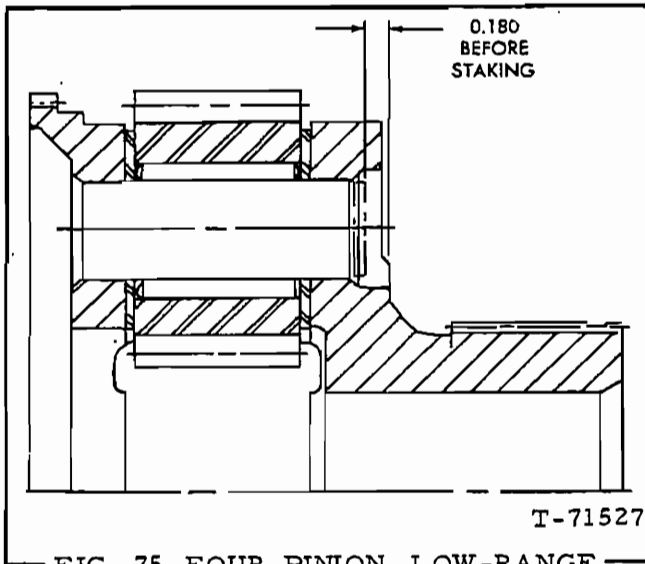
FOUR-PINION, LOW-RANGE PLANETARY CARRIER ASSEMBLY - CROSS-SECTION VIEW
